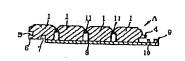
Fig. 2 is an enlarged cross-sectional frontal view
